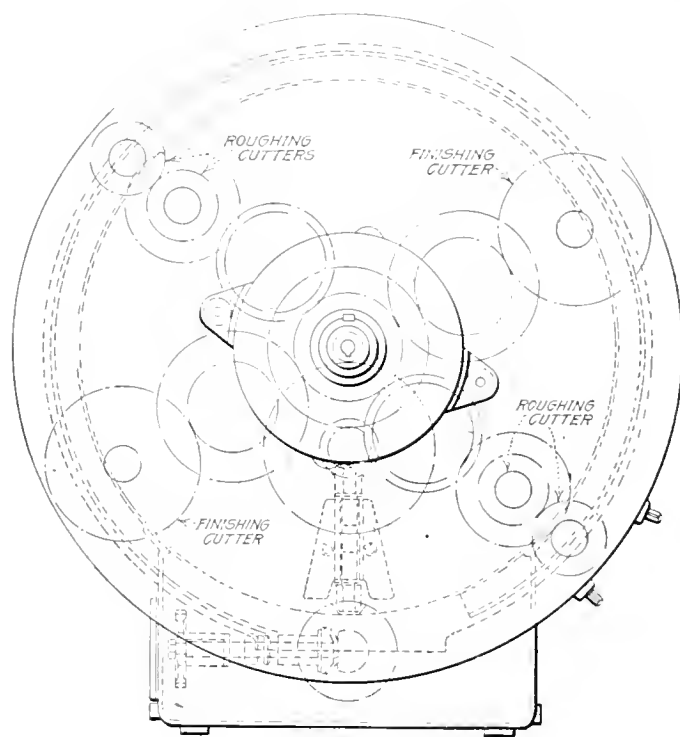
INGERSOLL DIFFERENTIAL-TYPE CONTINUOUS MILLING MACHINE (SECTIONAL VIEW OF THE MAIN WORKING PARTS)
